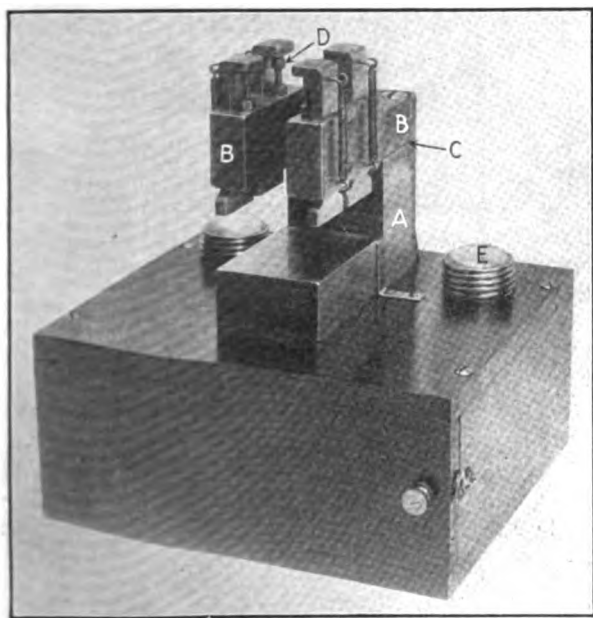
ELECTRICAL TESTING GAGE FOR PUSH RODS
